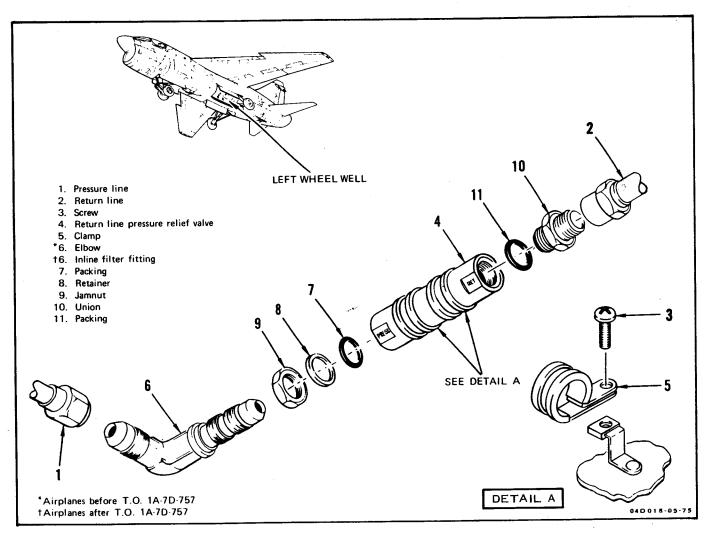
Return Line Pressure Relief Valve Removal and Installation
